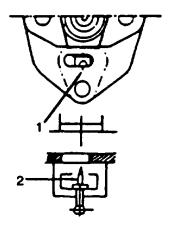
Align control Lever Pointer With Fuel Injection Pump Access Hole
